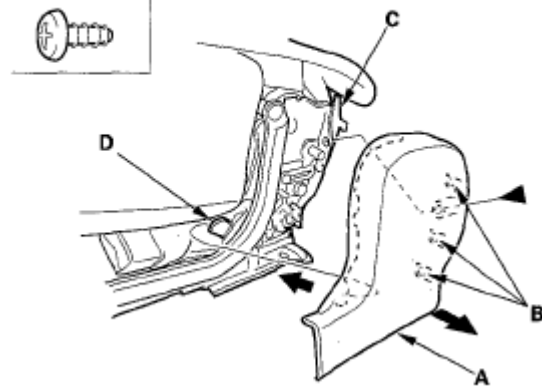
Identifying Center Outer Cover, Hooks And Recline Adjuster
